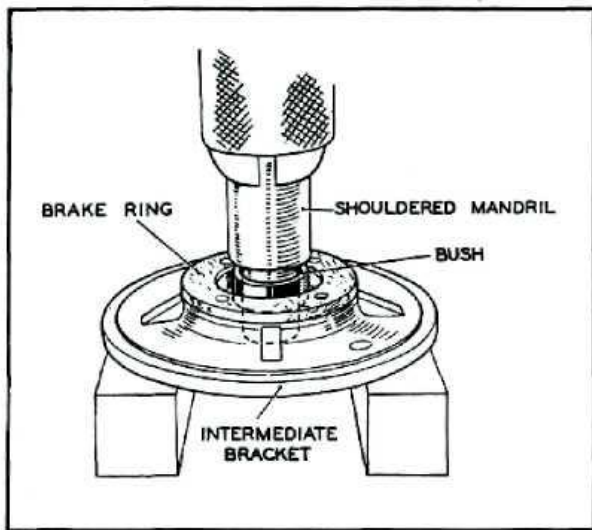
Fitting Bearing Bush to Intermediate Bracket.
